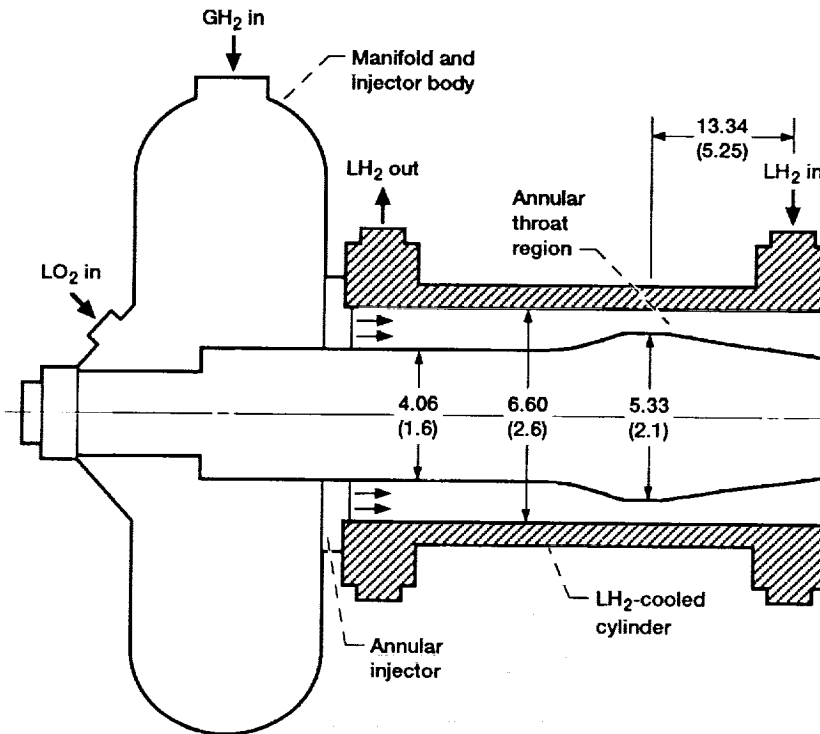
Schematic of cylindrical thrust chamber assembly. (Dimensions are in centimeters (inches).)
